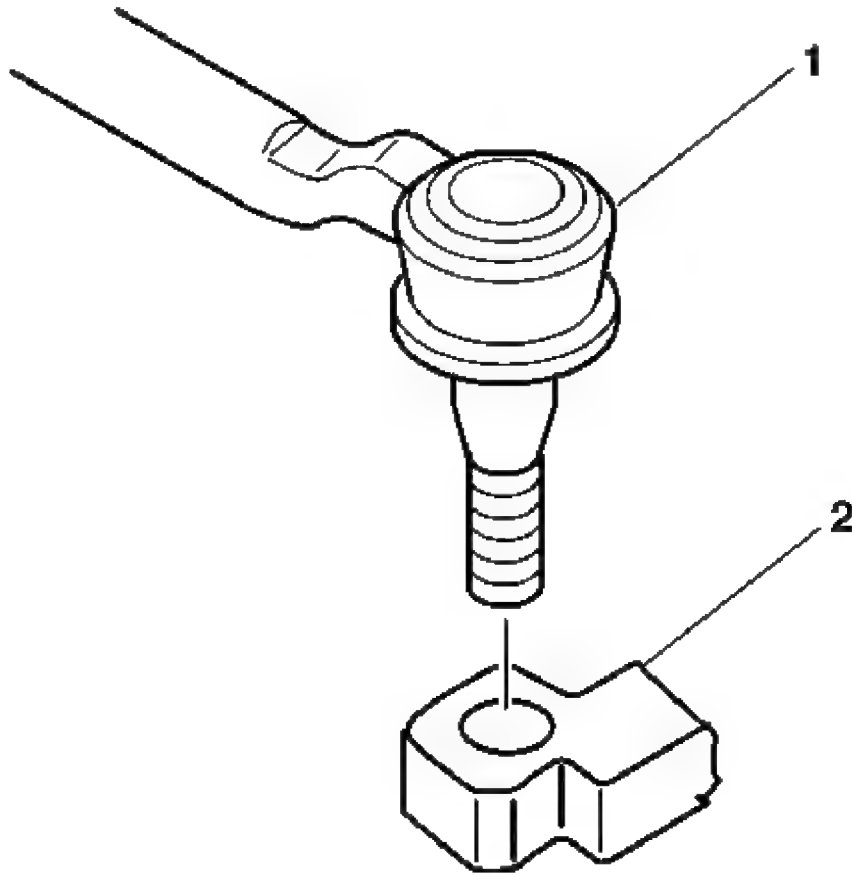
Installing Right Outer Tie Rod To Steering Knuckle
